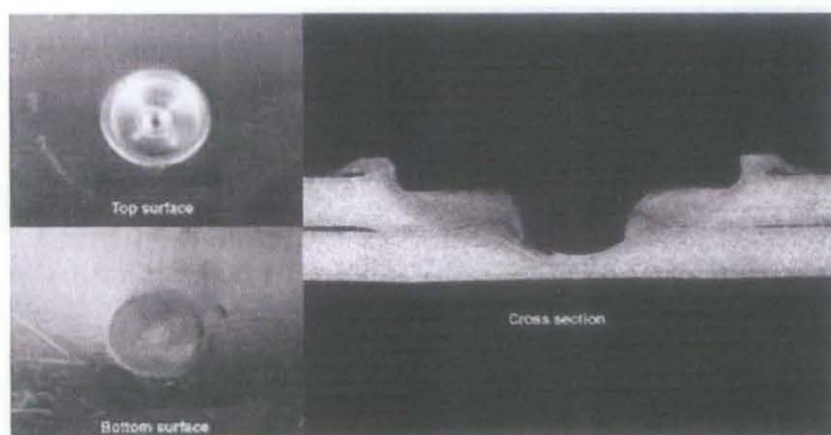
Spot friction stir welding appearance and cross section [5]
